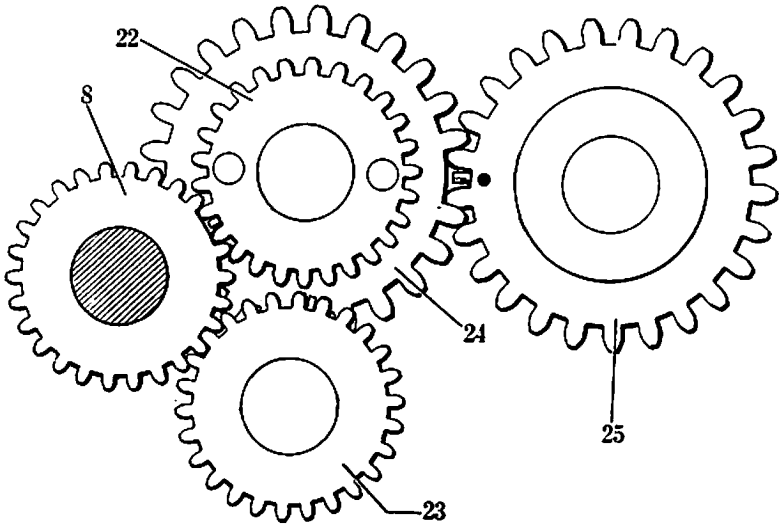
Single Distributor Screw Gears. This illustration is designed to show the timed relationship of the gears. The distributor clutch shaft gear 8 meshes with gear 22 on the upper front distributor screw and with gear 23 on the lower front distributor screw. The back distributor screw gear 25 is turned by the large gear 24 on the upper front distributor screw.
